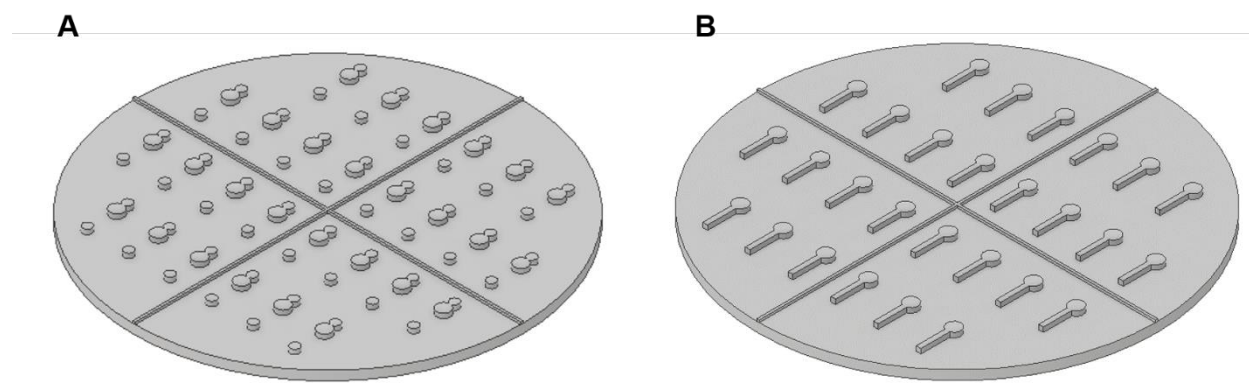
Molds for the (A) top and (B) bottom of the chip
